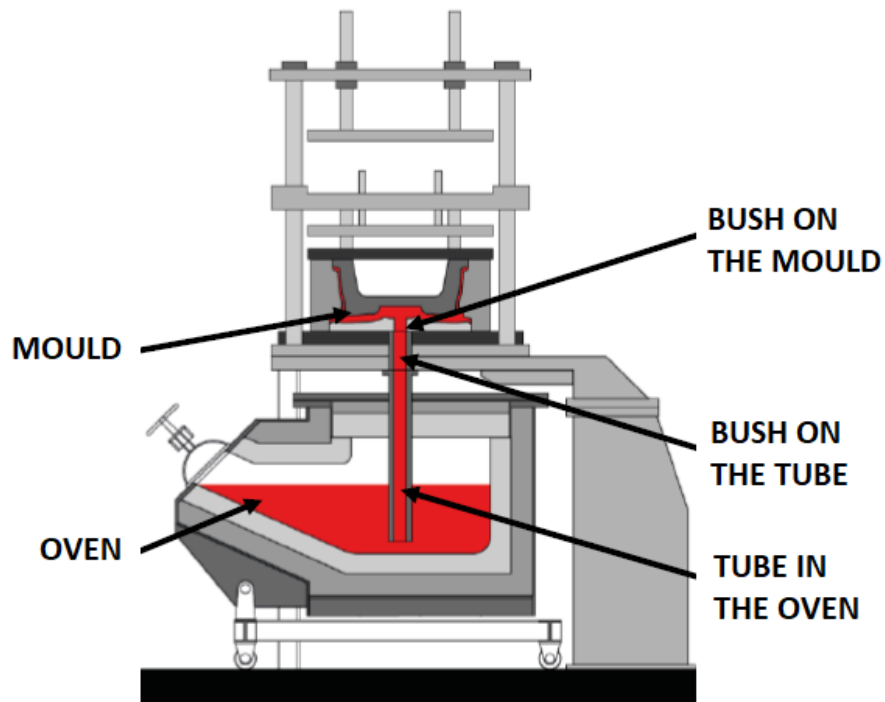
Schematic plot of the casting machine. The oven contains fused alloy that rises the tube in order to fulfill the mold. After wheel casting, the mould is opened and the released wheel sent to a conveyor.
